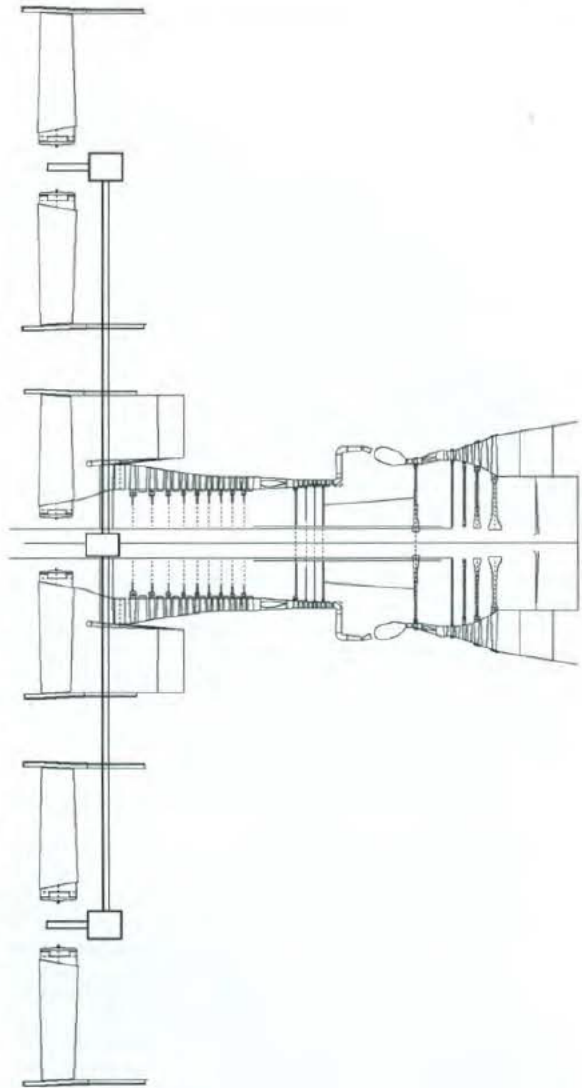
Design C: Geared turbofan for the Silent Aircraft modified for lower noise
